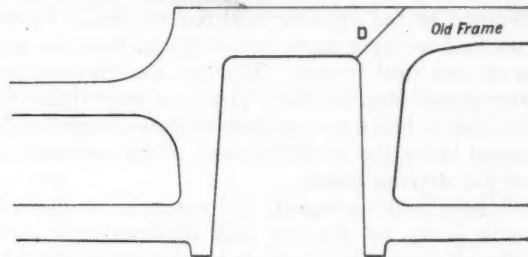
With This Weld Allowance Must Be Made for Shrinkage
